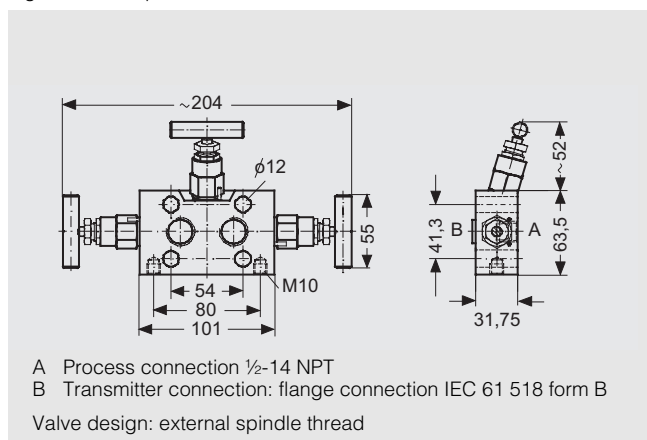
/81 Three-spindle valve manifold DN 5, dimensions
